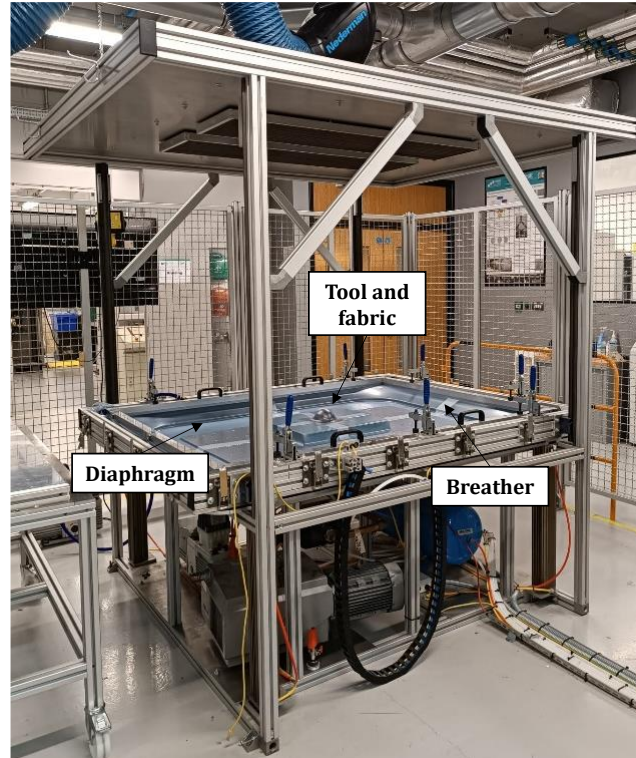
Laboratory-scale Double diaphragm forming machine.
